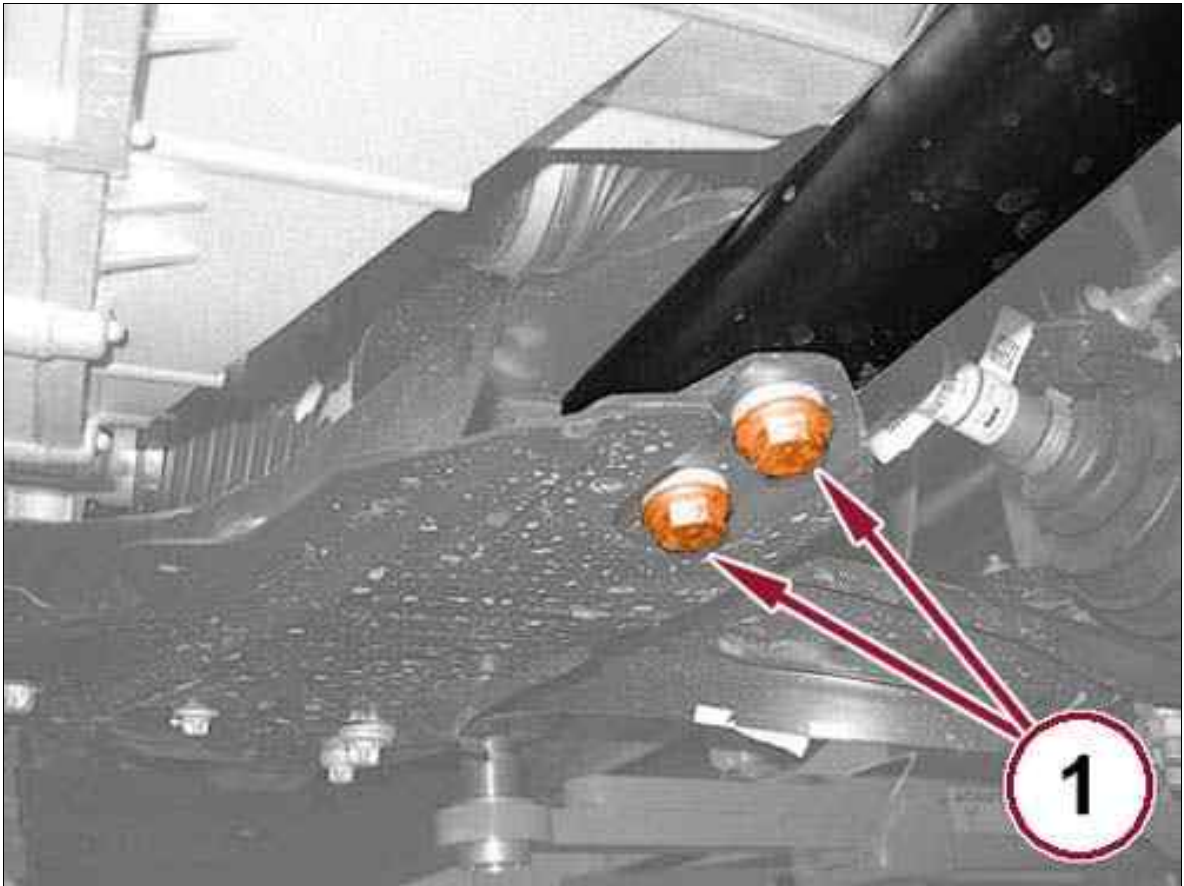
Right And Left Front Lower Frame Struts & Bolts
